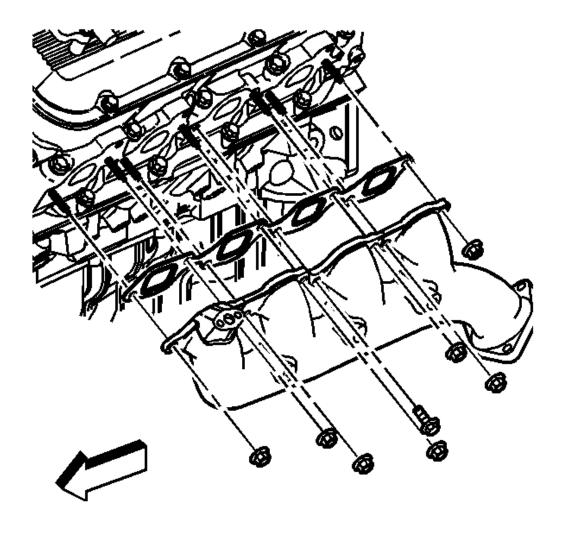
View Of Left Exhaust Manifold, Gasket, Bolts And Nuts Courtesy of GENERAL MOTORS CORP.
